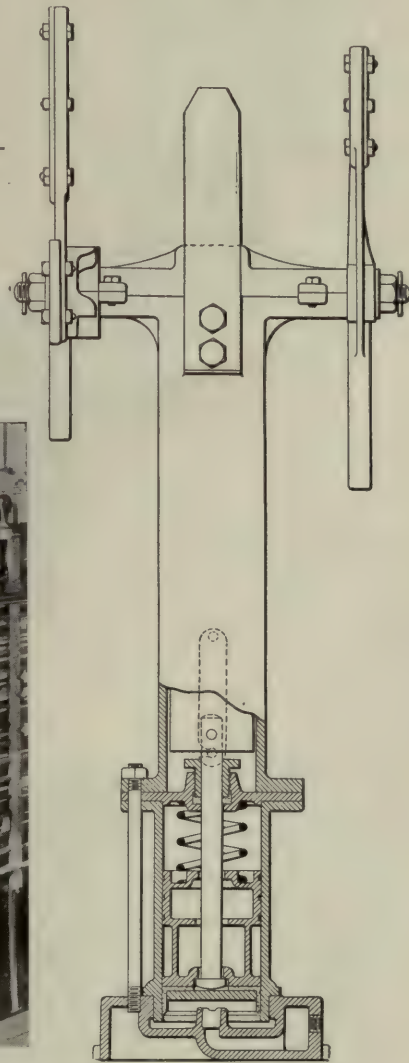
Low-Pressure Pneumatic Interlocking Machine.
